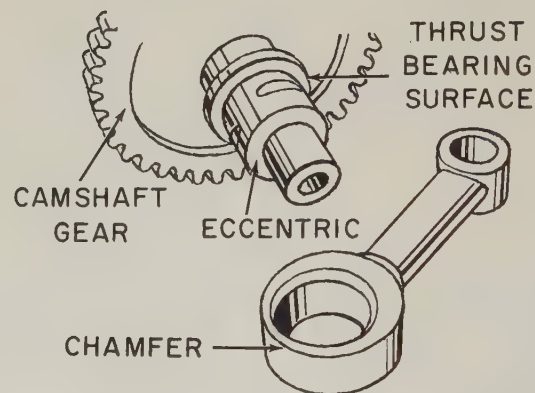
The plunger-type oil pump is assembled on an eccentric on the camshaft. (Tecumseh Products Company)
